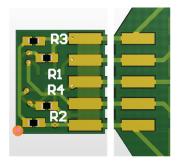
HDC1000EVM : Pads for I2C and Supply of the Smaller Sensor Module
